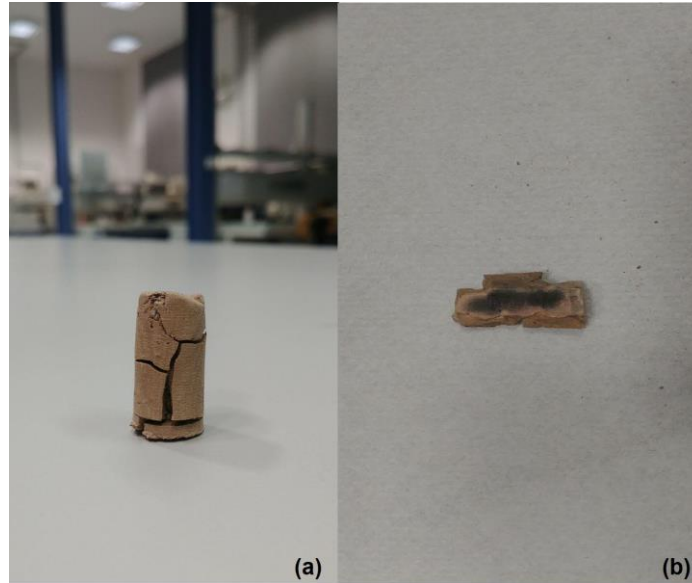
Example of an annealed cylindric casted specimen. Cracks are evident before testing (a) and a burning in the central region can be observed from the fracture surface (b)
